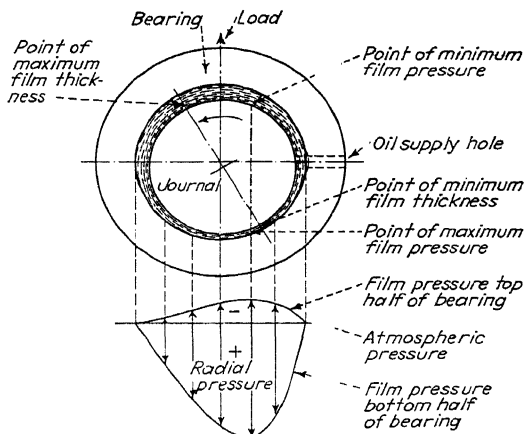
Oil-film pressure in a bearing having no oil grooving.
